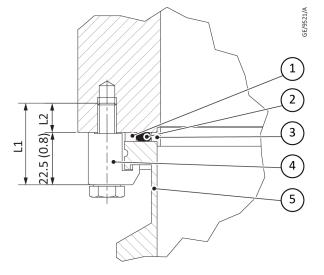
Mounting high vacuum flange ISO-K flange at ISO-F flange with claws
